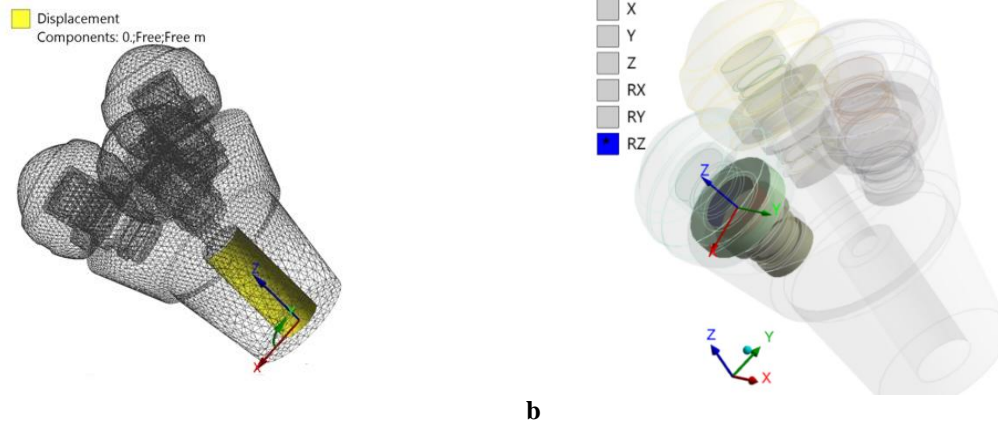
Boundary conditions of drill bit loading: a – rotation of drill bit, b – rotation of cutters.
